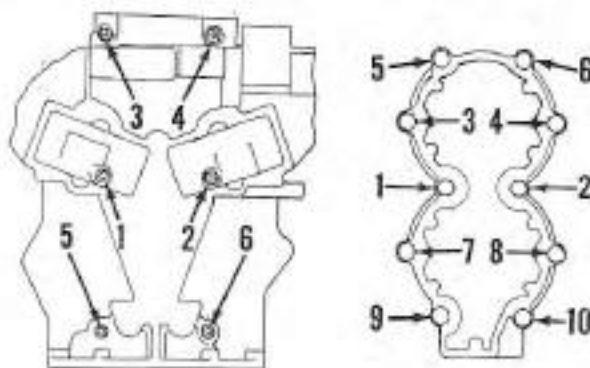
Tighten the cylinder head screws to a torque of 150 inch pounds in the sequence shown in right view. Tighten crankcase main bearing bolts to a torque of 200-225 inch pounds in the sequence shown in left view.
